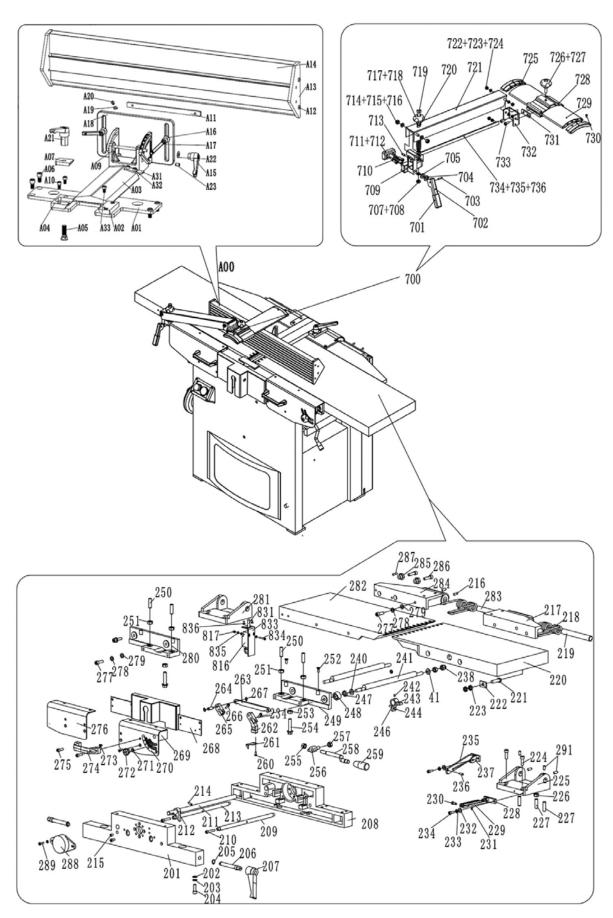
Spare parts drawing 2 ADH 31-4 C and 41-4 C
